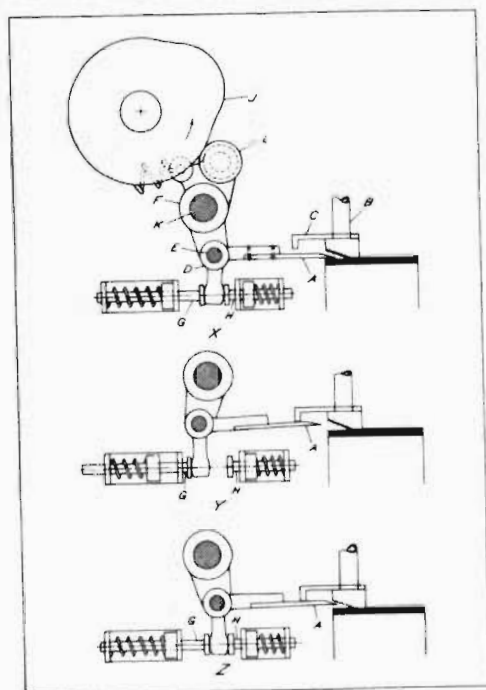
Hold-down finger A is synchronized with suction cup B through cam J and bellcranks D and F.
